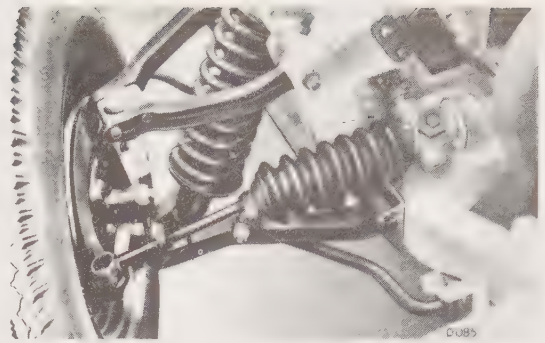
2 Pinion end of rack housing, showing U-bolts to chassis, steering shaft coupling, and track-rod details.
